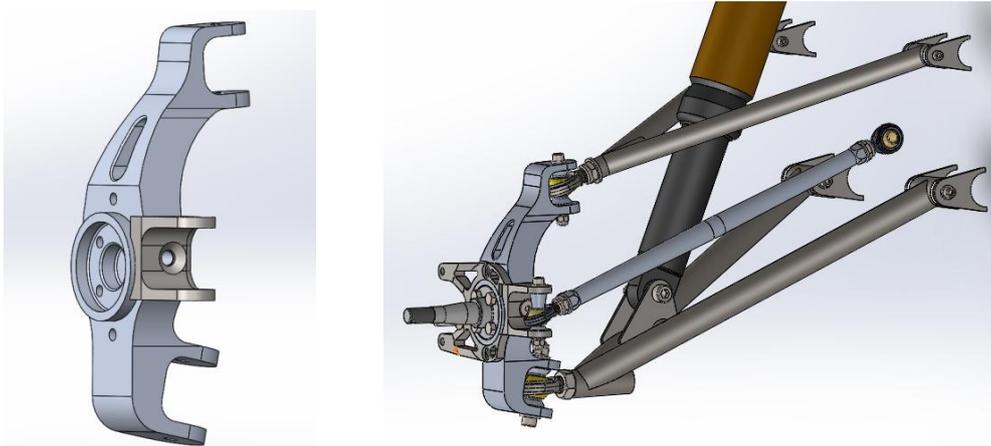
On the left: steering knuckle with support. On the right: frontal-right suspension assembly.
